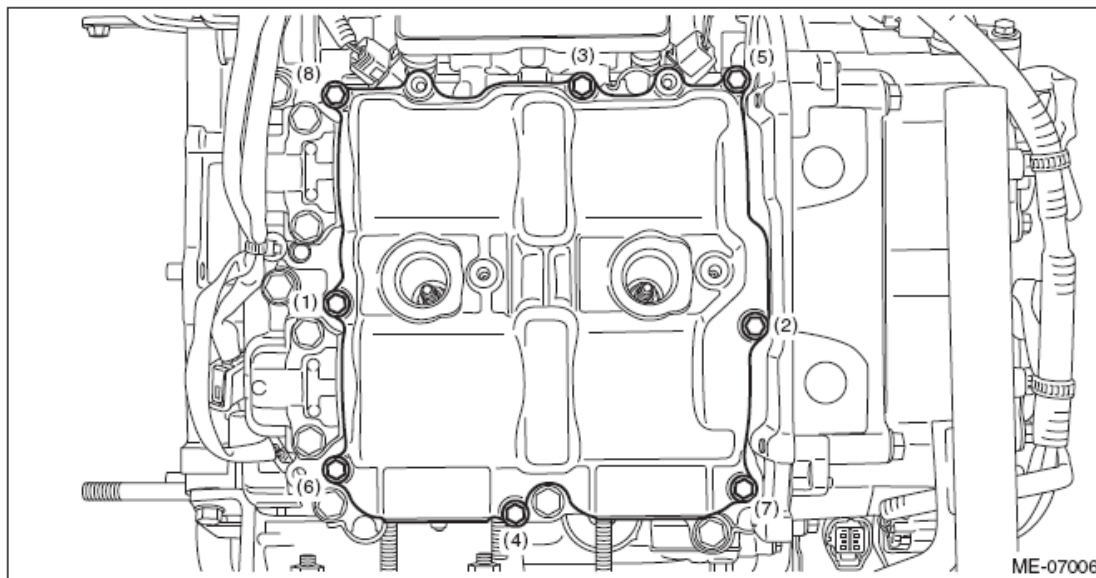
Identifying Rocker Cover Bolts Tightening Sequence
